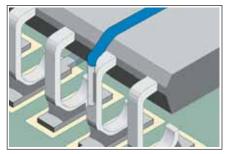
Not Recommended* Wire soldered to lead, over component.
